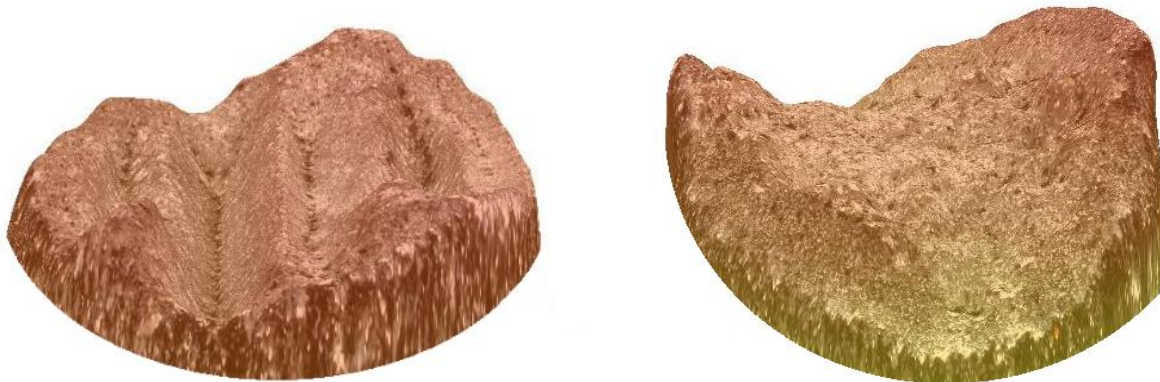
Reconstructions of the fracture surfaces via optical microscope. a) $\pm 45^\circ$ Tensile specimen. b) 67° k Tensile specimen.
